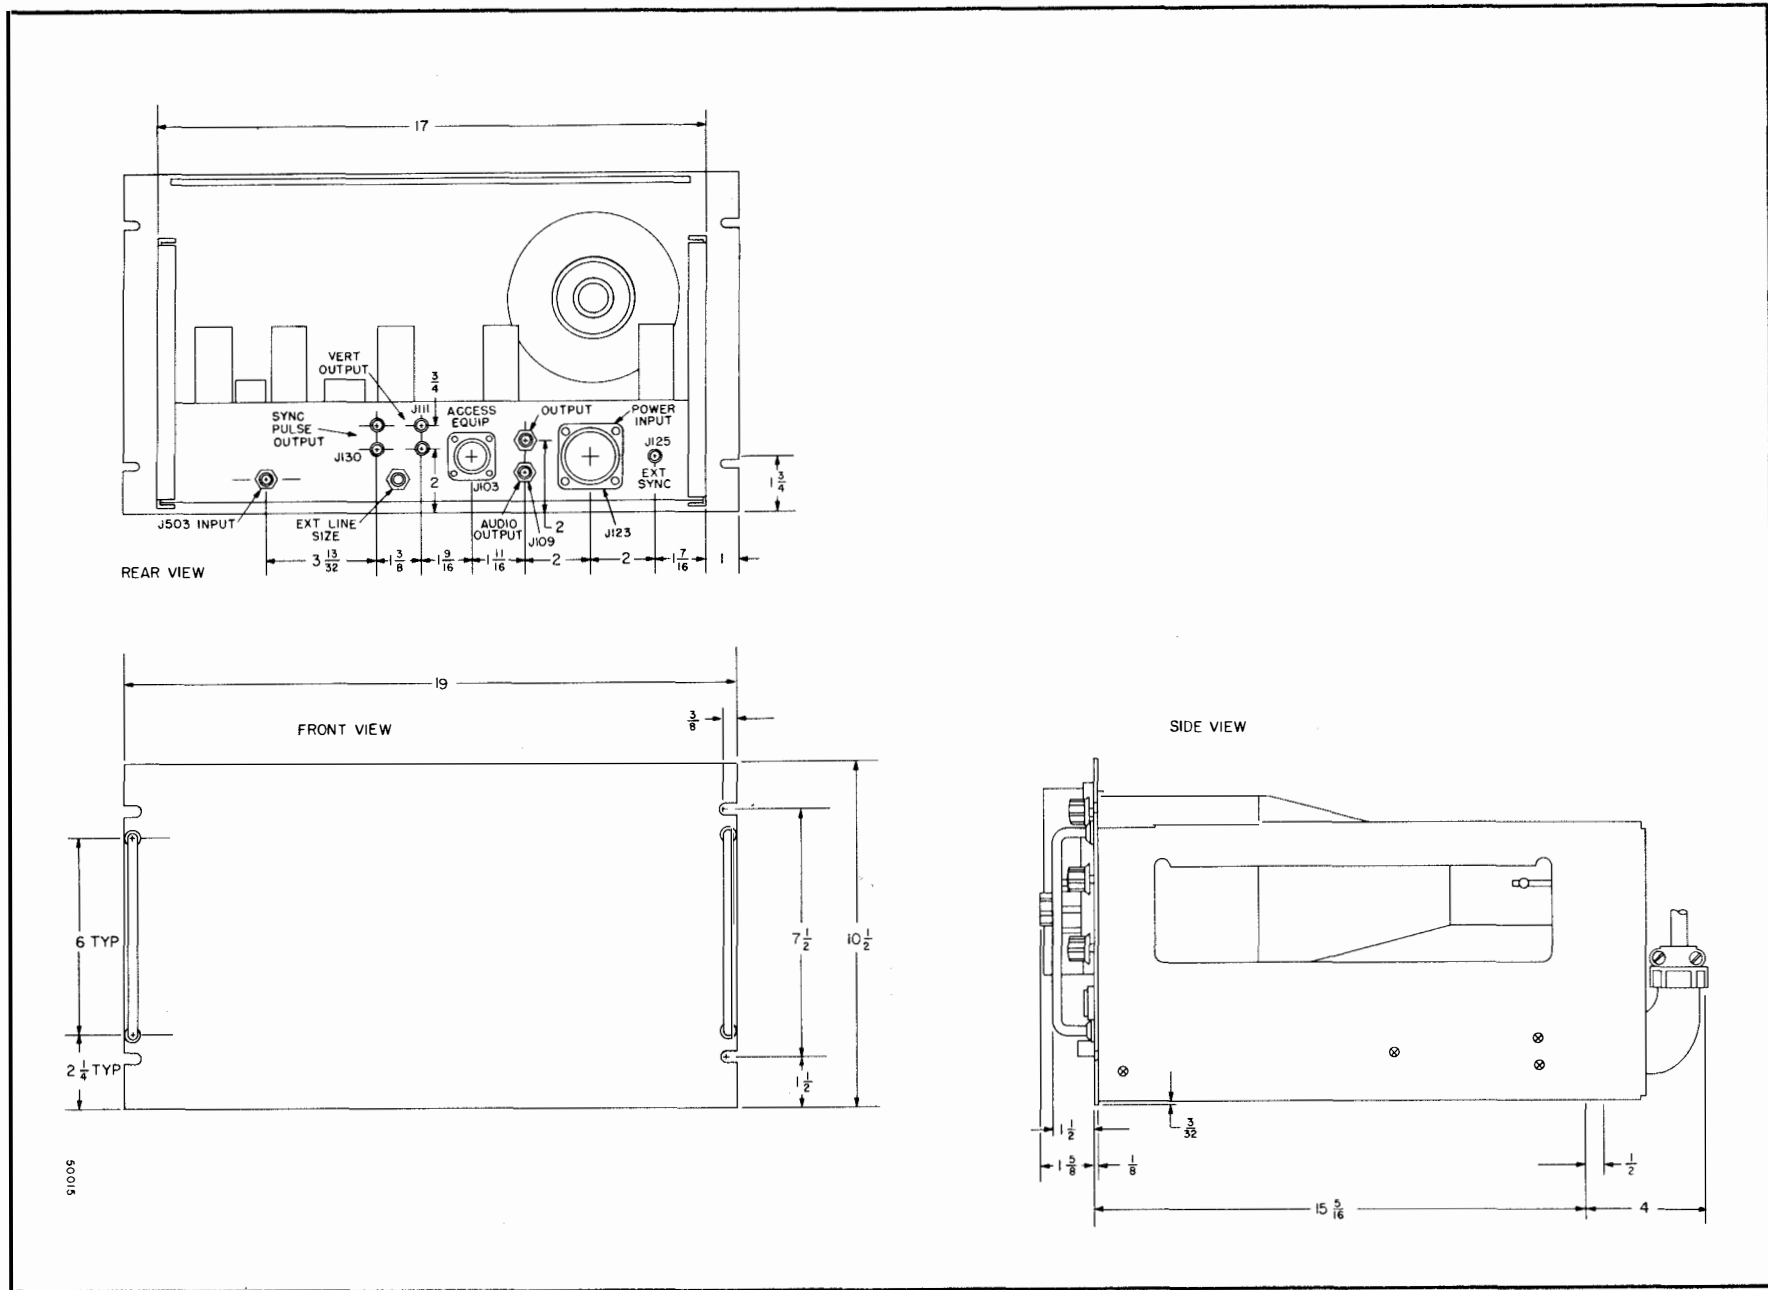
Outline Dimensional Drawing, Analyzer Section, Rack-Mounted Style, Series 2
